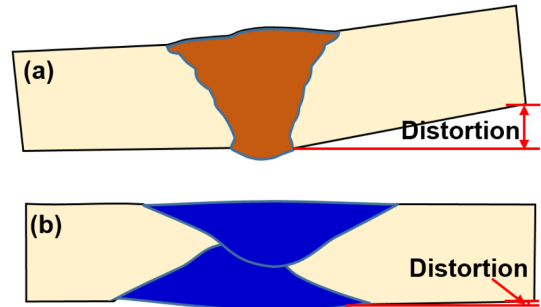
Illustration for weld distortion of (a) GTAW and (b) FSW.
